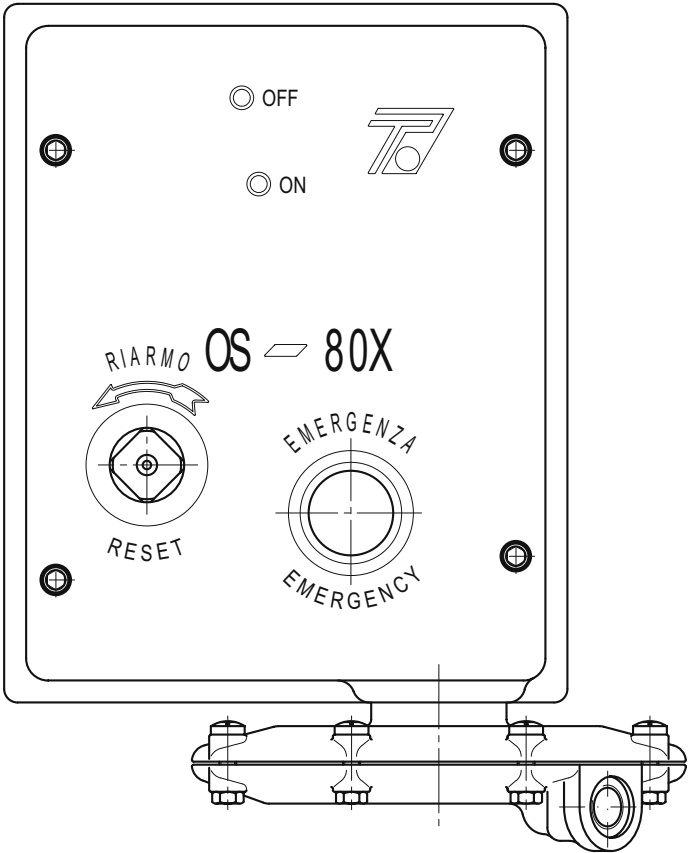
OS/80X Series Slam-Shut Controller Detailed Assembly (Standard Version)
